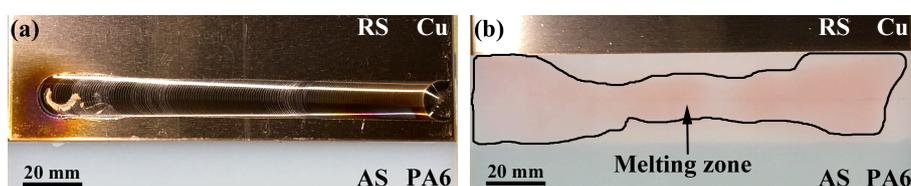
Typical macrostructural surface morphologies of the FLJ joints of Cu to PA6 at 800 mm/min: (a) front side, (b) back side
